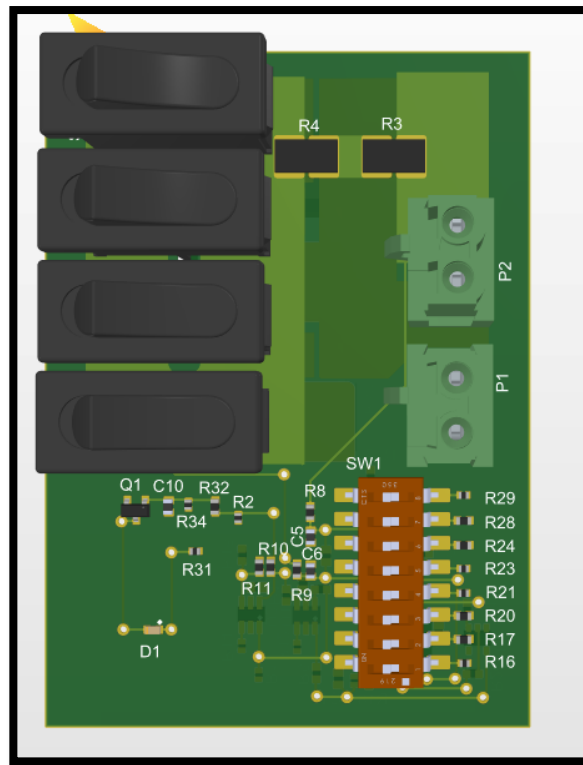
The 3D View from the Top Side of the Initial PCB
